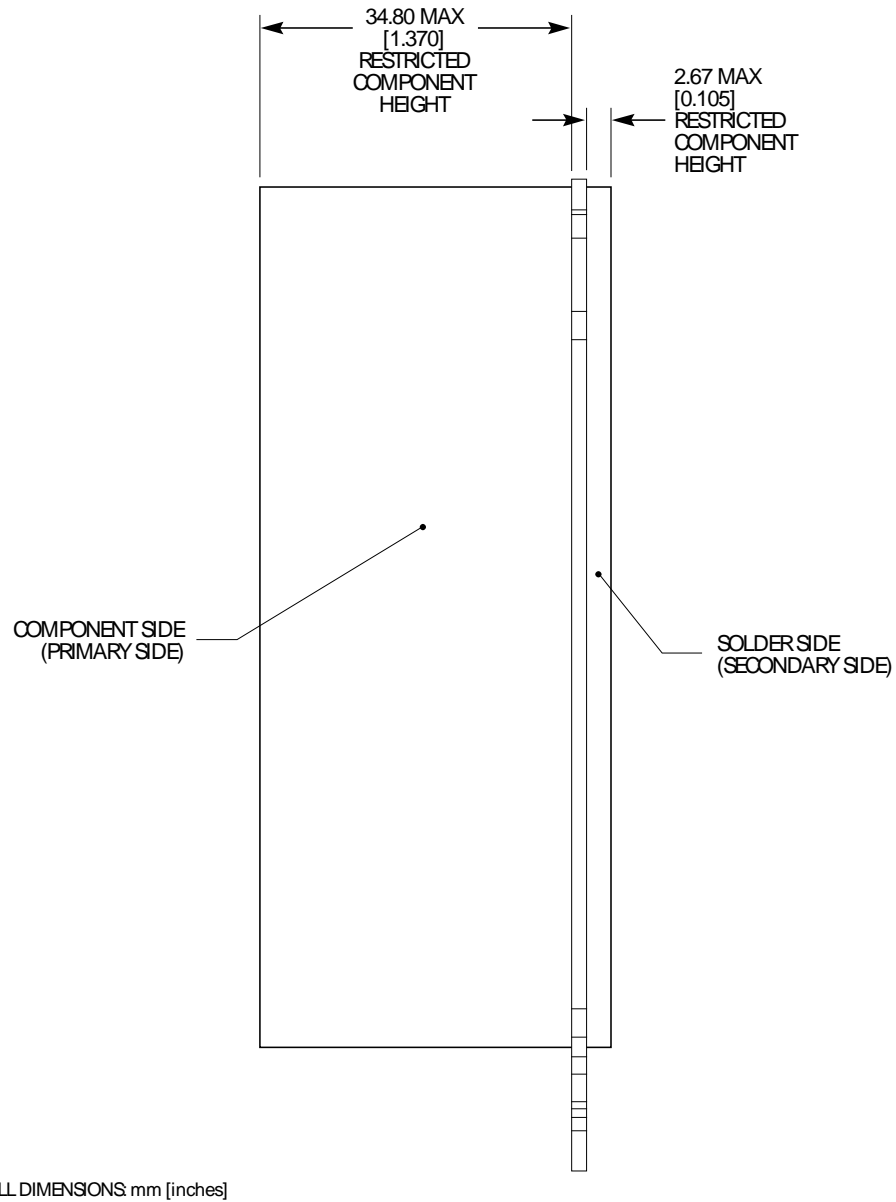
PCI Express DUAL-SLOT Add-in Card Dimensional Drawing
